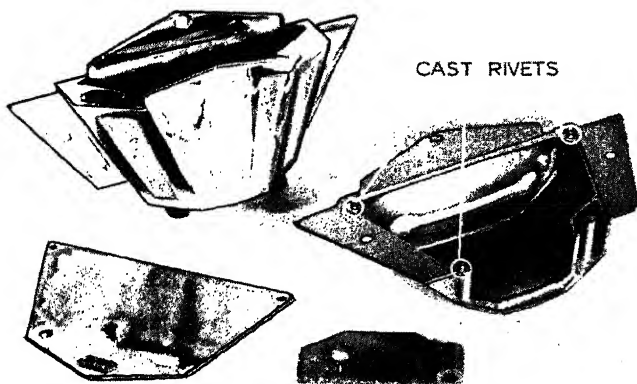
Three separate die-castings which are assembled by means of rivets indicated by the arrows
